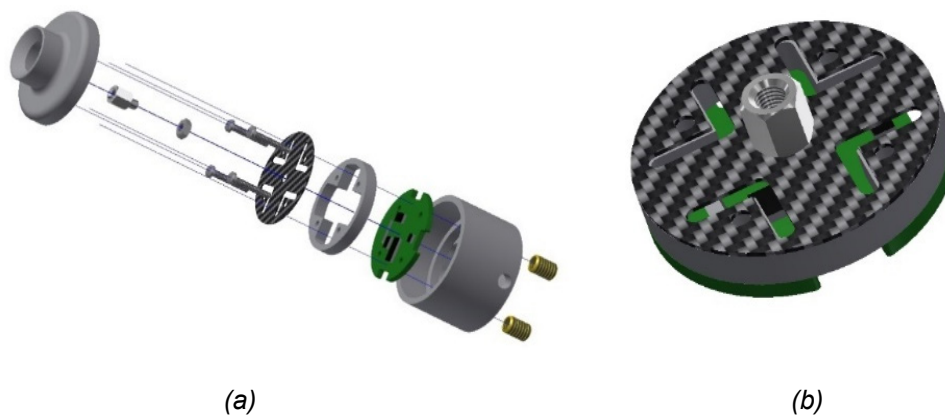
(a) Exploded view SG version 2 and (b) sensor unit SG version 2
